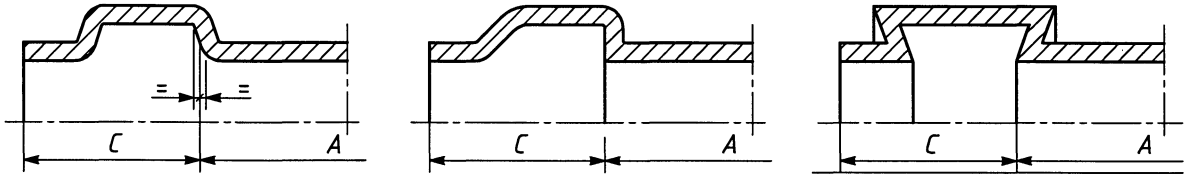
Typical groove designs for elastomeric ring seal sockets
